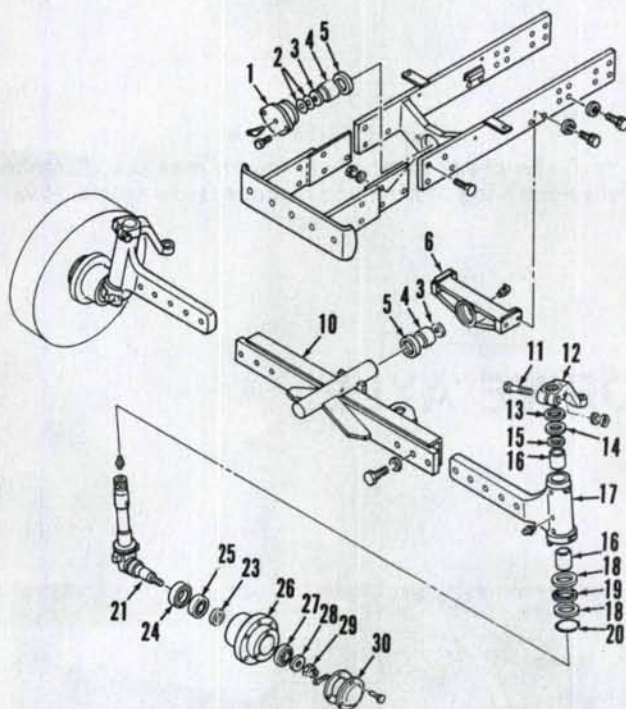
Exploded view of adjustable tread width front axle assembly used on Model 1720. Axle assembly used on Models 1920 and 2120 is similar except that spacer (23) is not used on Model 2120.
